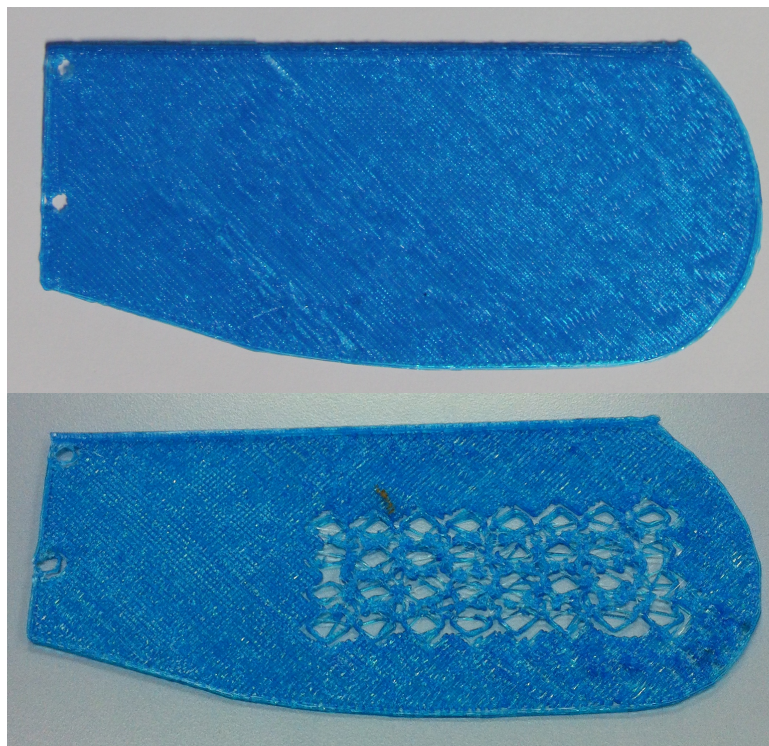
Top: Wing section type (a) 3 layers thick with 1.5mm leading edge spar and mounting holes
